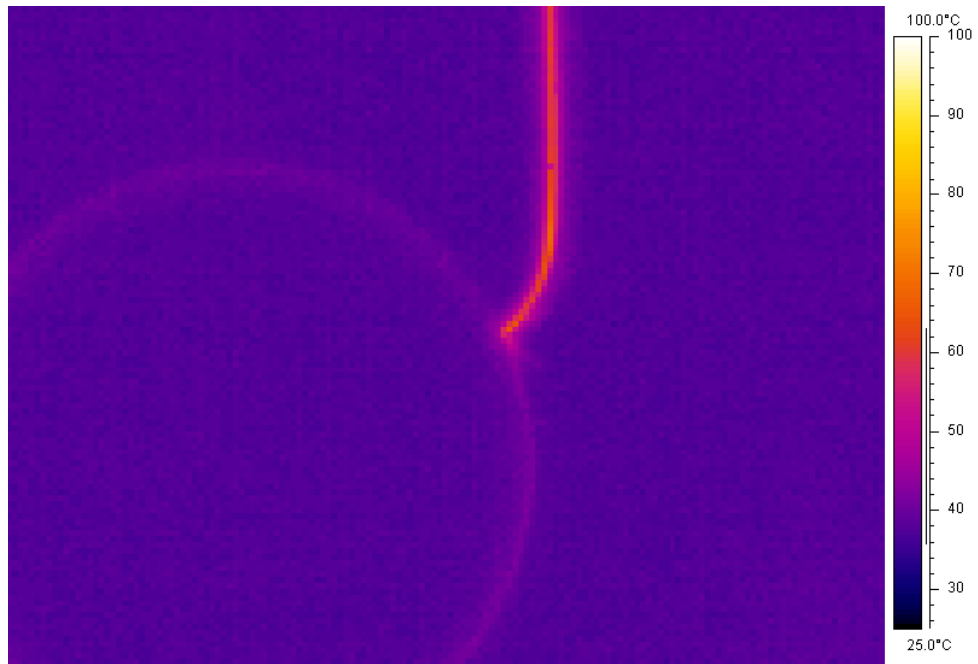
MQL machined FSP sample at 0.1 mm/rev feed and 150 m/min cutting speed
